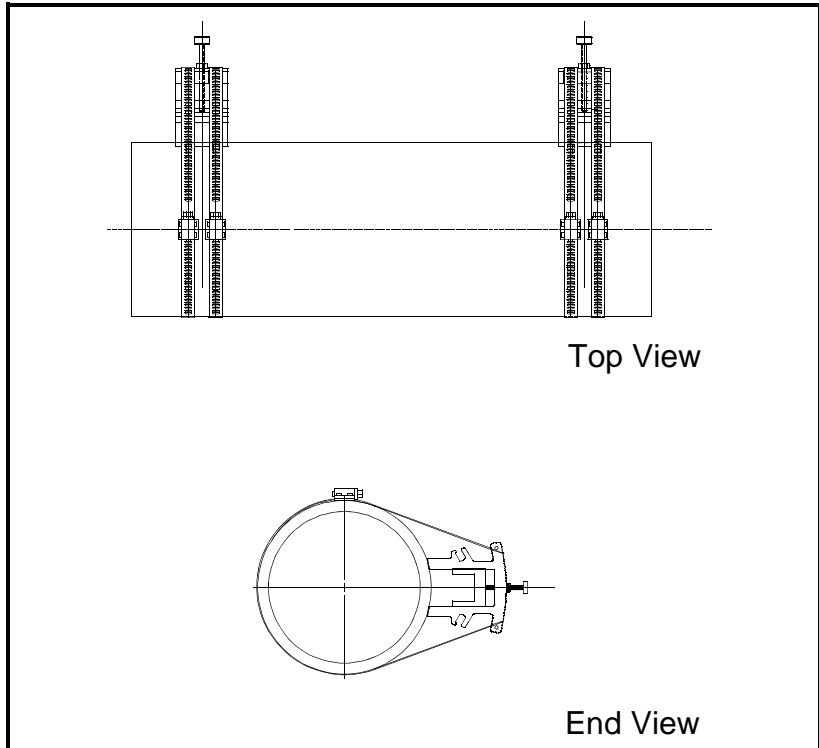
A Double-Traversal CF-ES Installation without Transducers
